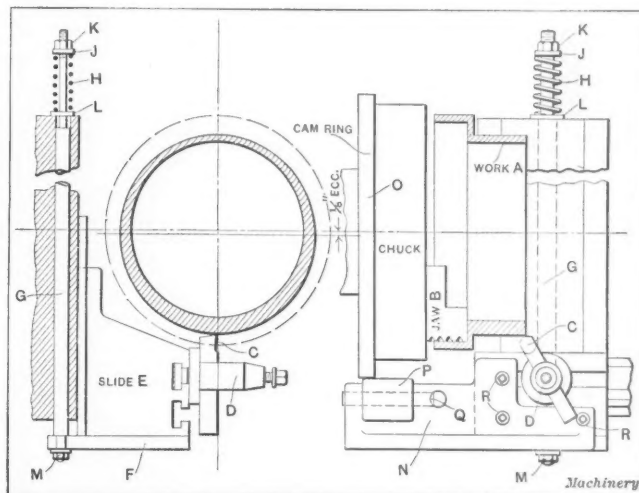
Eccentric Turning Attachment for Engine Lathe
